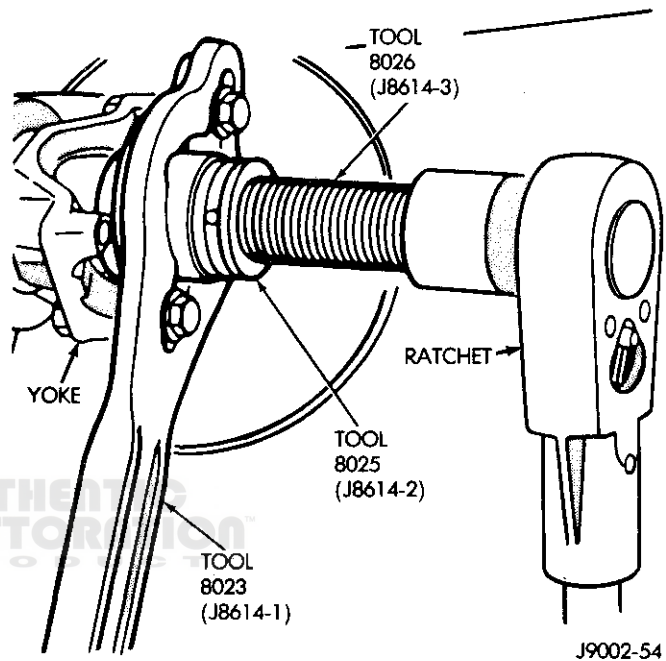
Drive Pinion Gear Shaft (Axle) Yoke Removal
